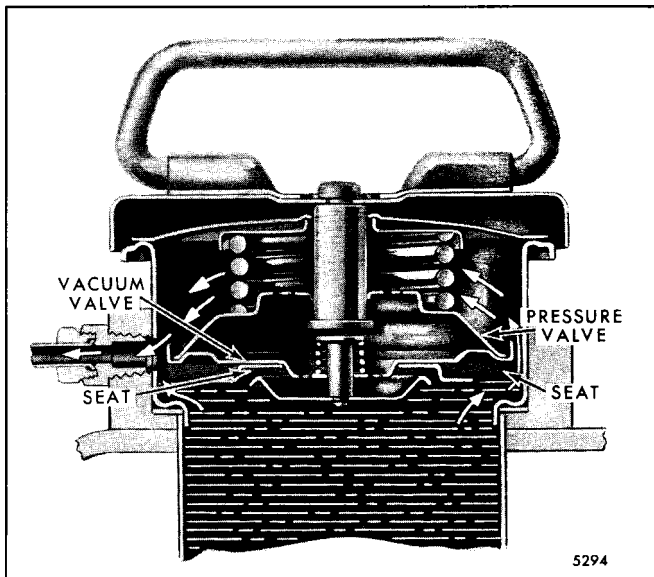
Pressure Control Cap (Pressure Valve Open)
